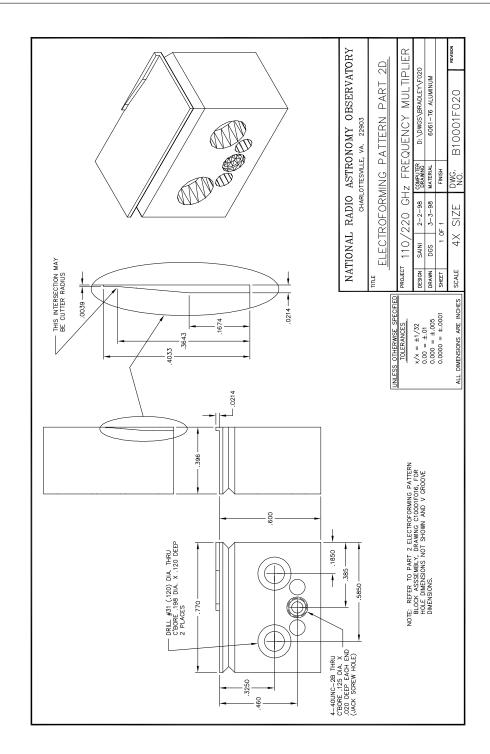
110/220 GHz frequency doubler: Mechanical details of the mandrel
